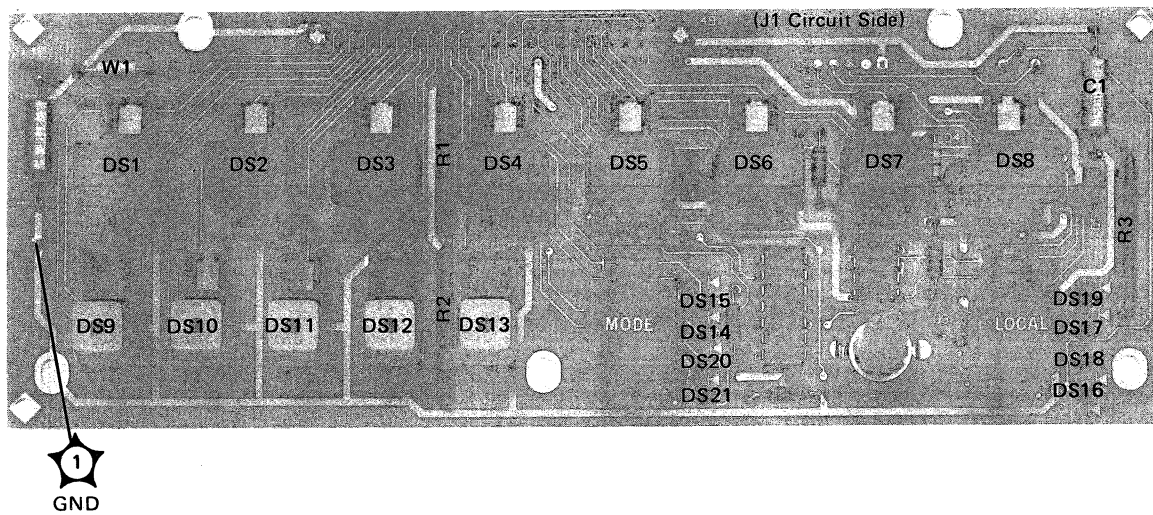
Front Panel Key and Display Board Assembly Component Locations
